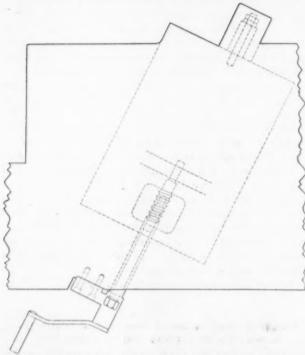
Fixture for combined boring and notching of bearings is moved diagonally by screw mechanism in base. Fixture is secured to the machine carriage.
